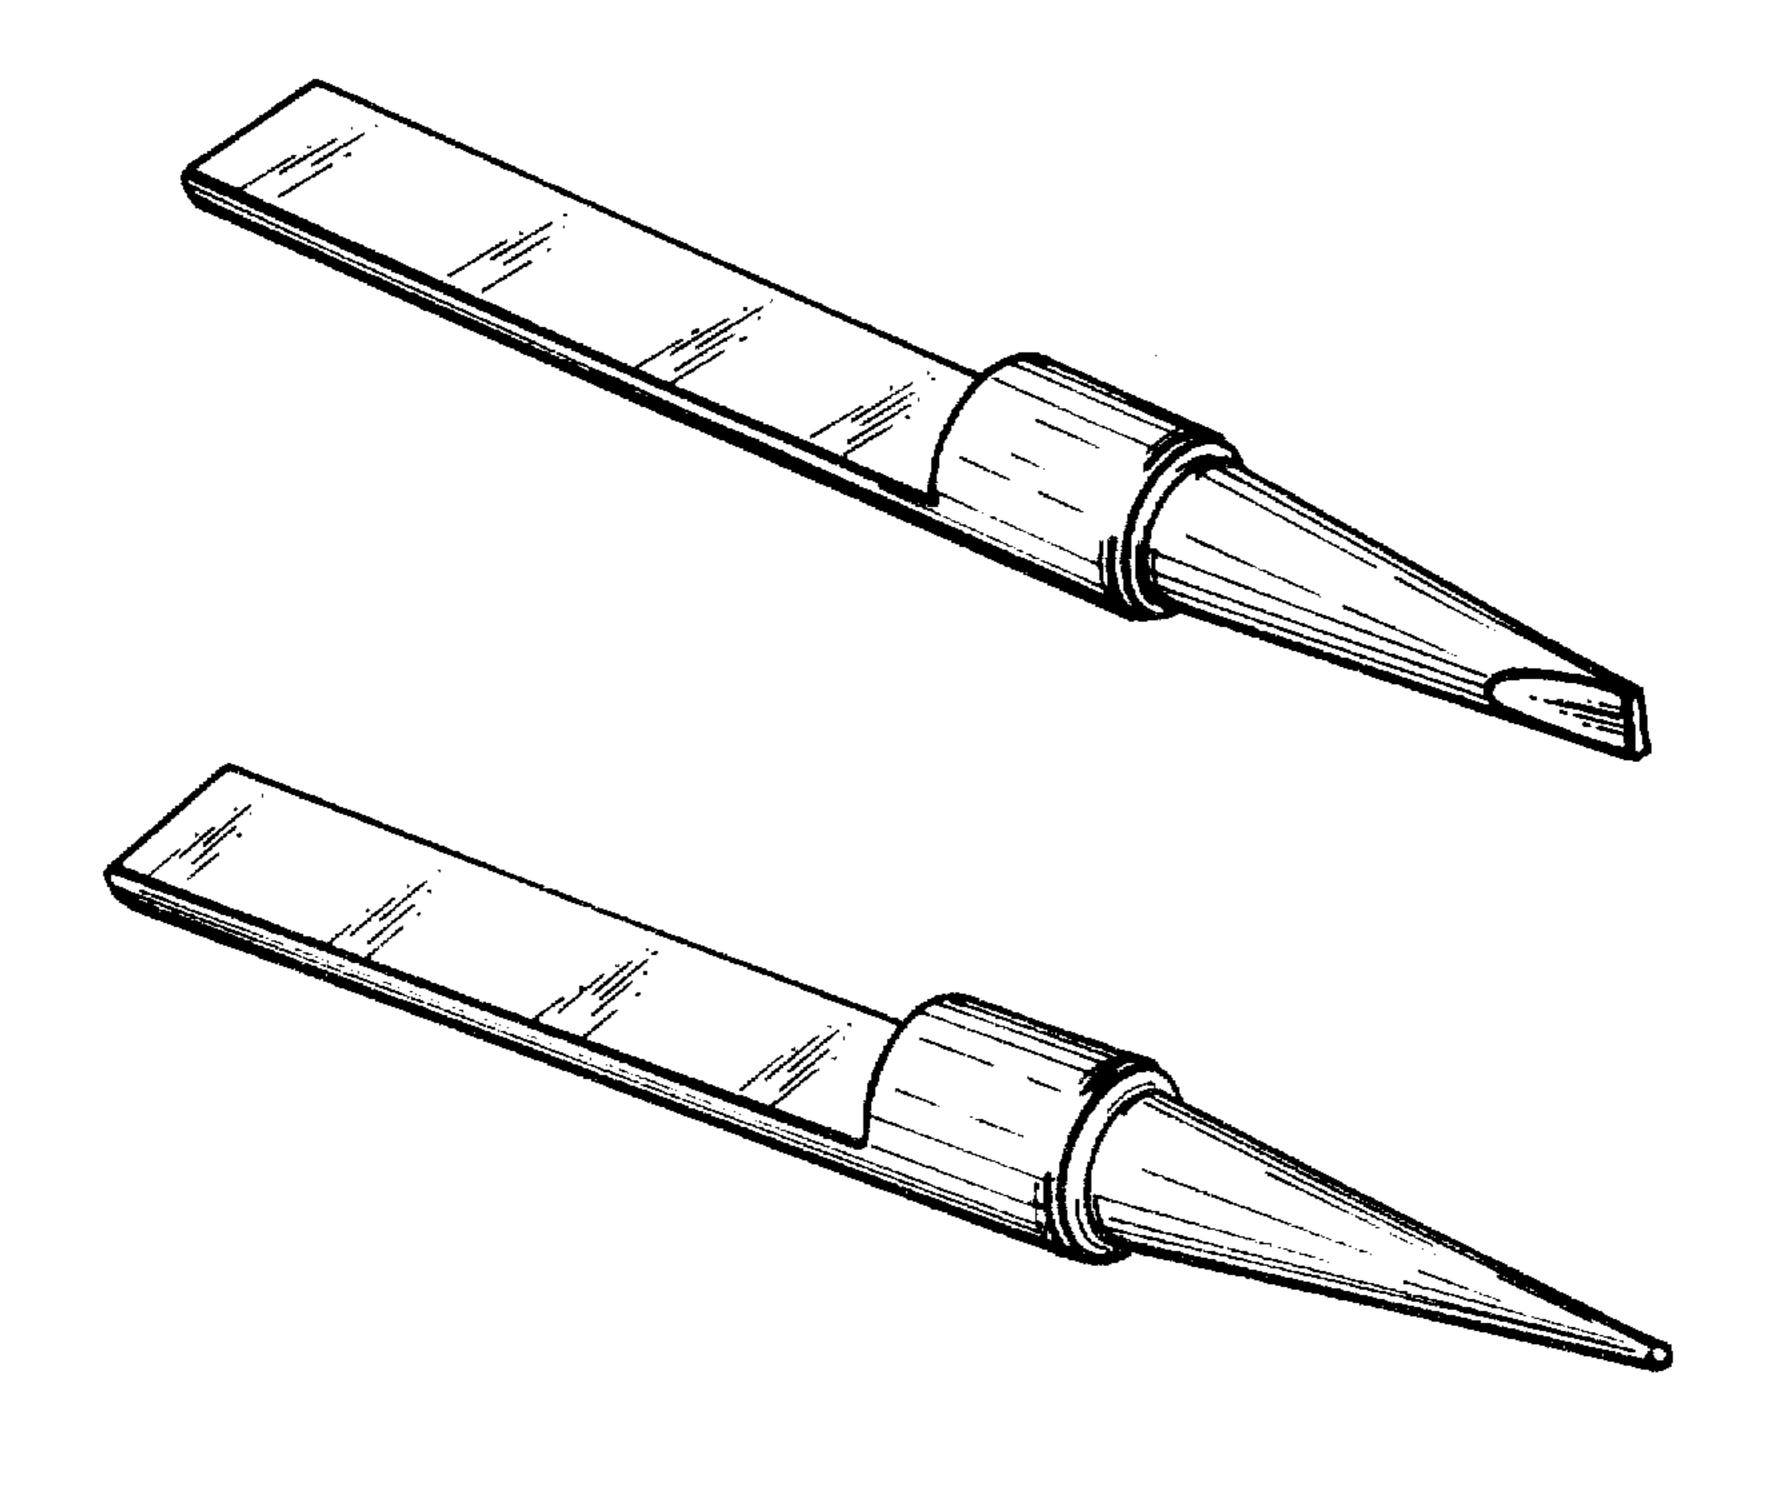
is an isometric view of a still further modified view showing the top, the front and one side of a modified soldering iron tip embodying the new design of my invention;
